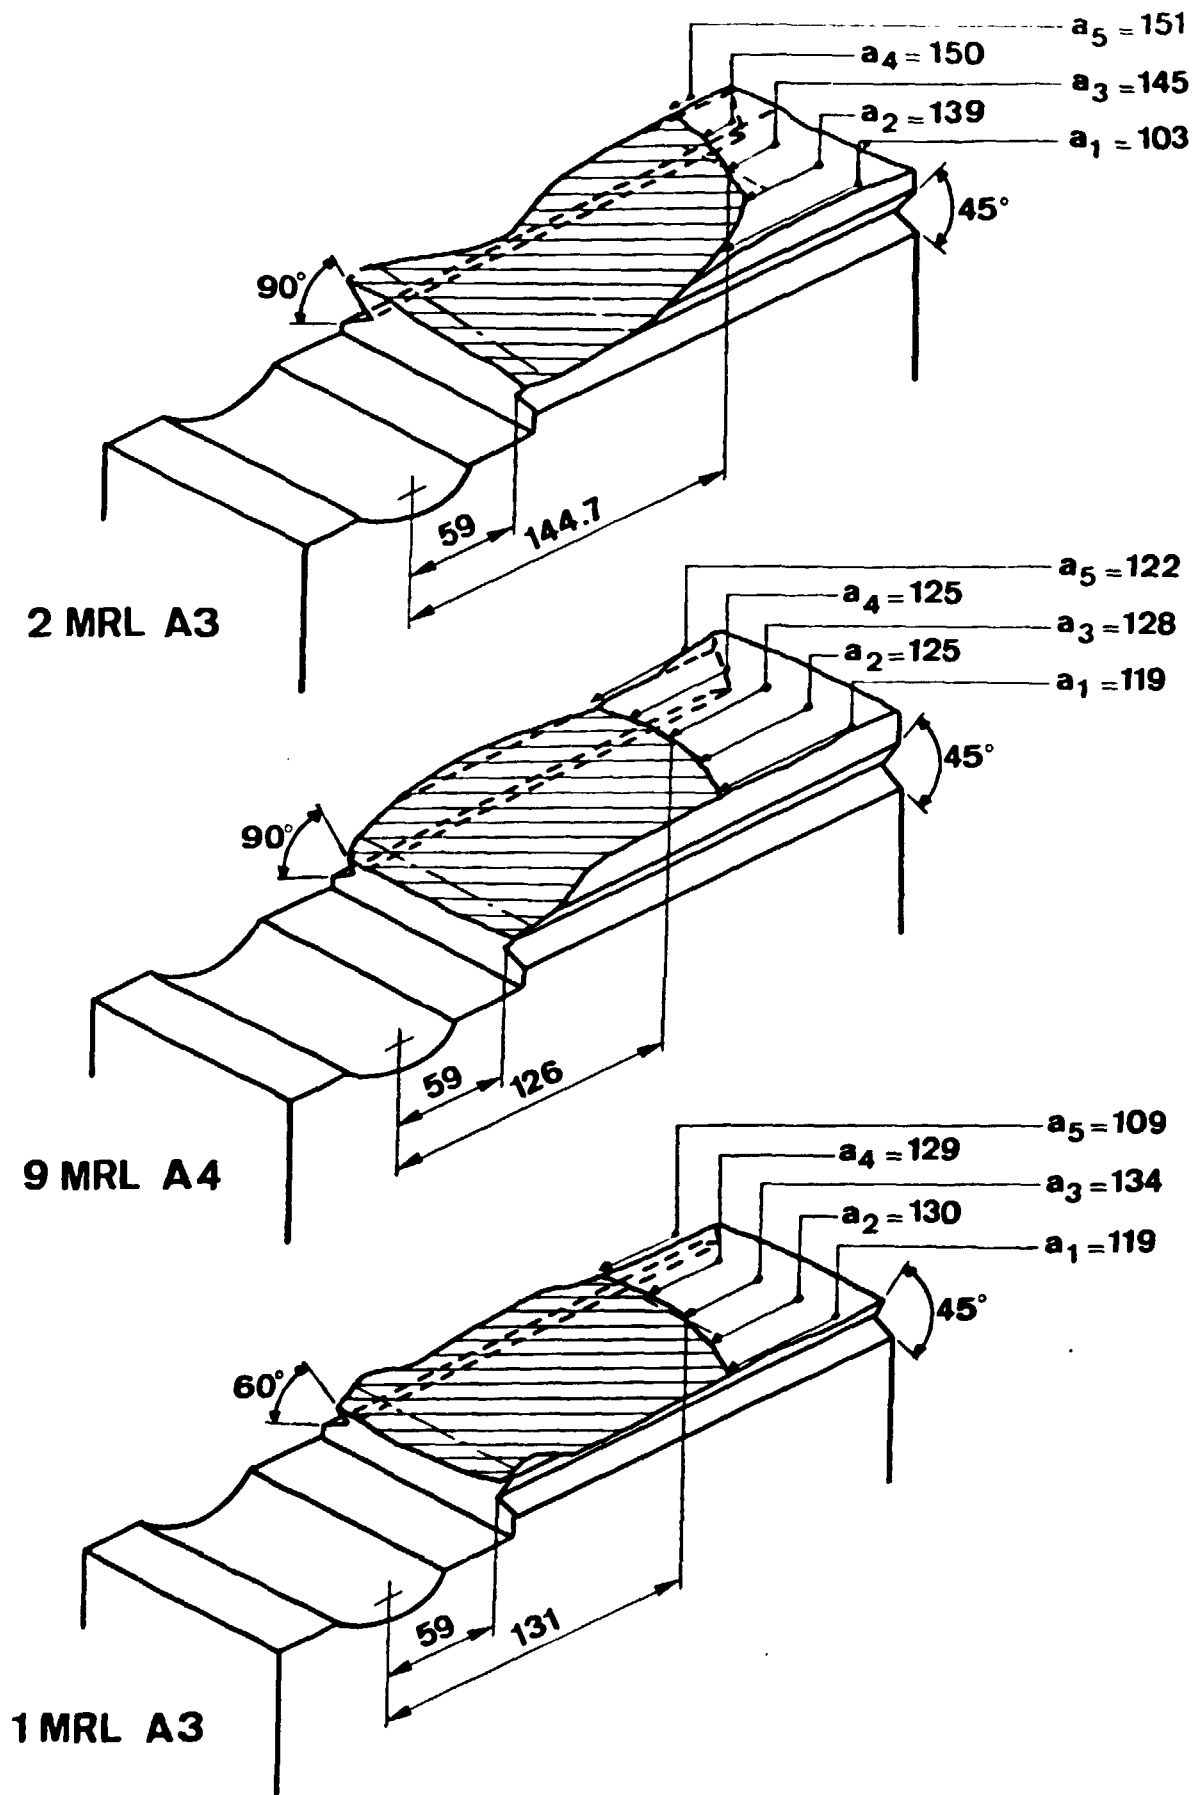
CRACK ARREST SPECIMENS AFTER HEAT TINTING AND FINAL FRACTURE IN LIQUID NITROGEN.
